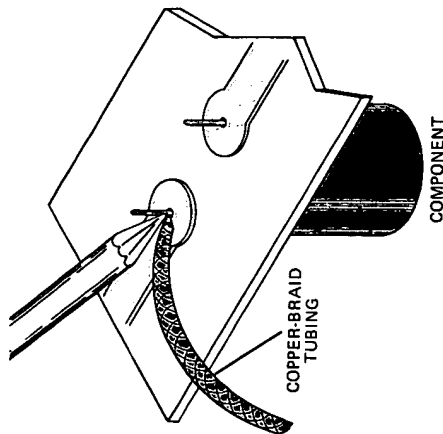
Using copper-braid tubing to remove excess melted solder from a solder connection.
